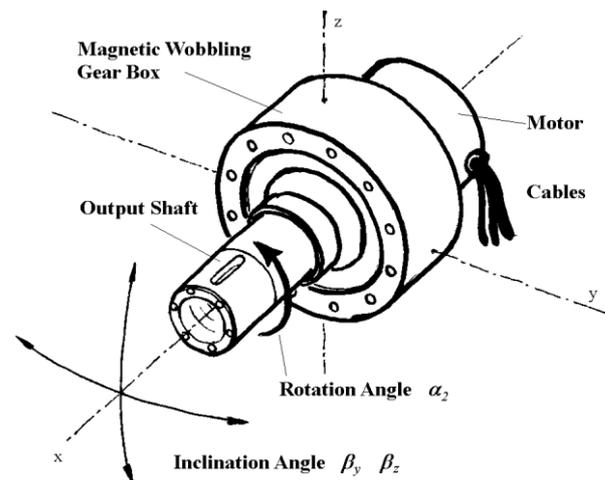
Magnetic Gearing Actuator with Coaxially Aligned Output Shaft, Mode 1.
